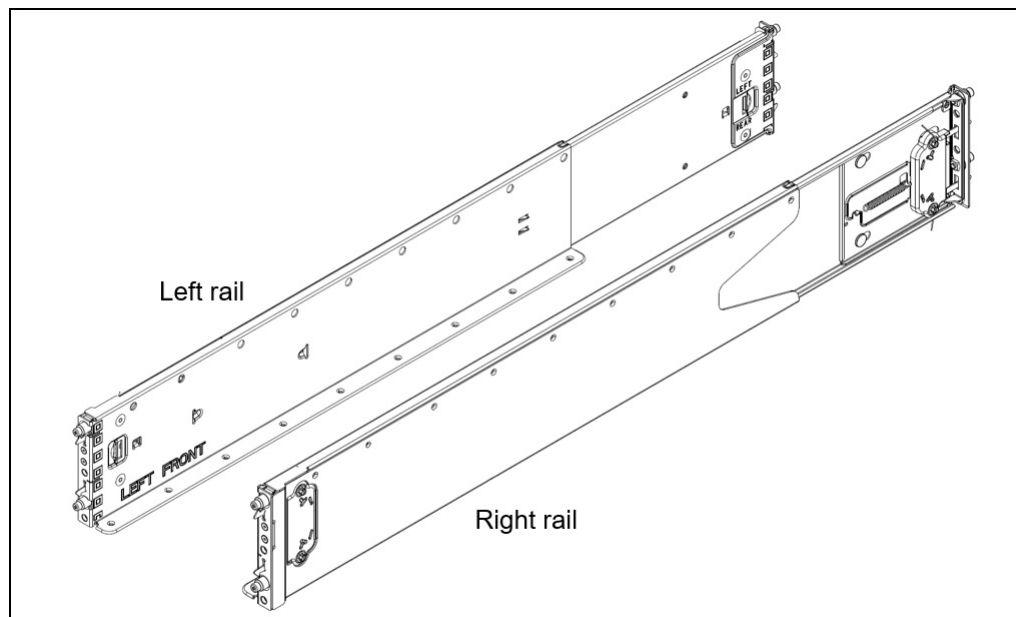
ThinkSystem Toolless Fixed Rail Kit
